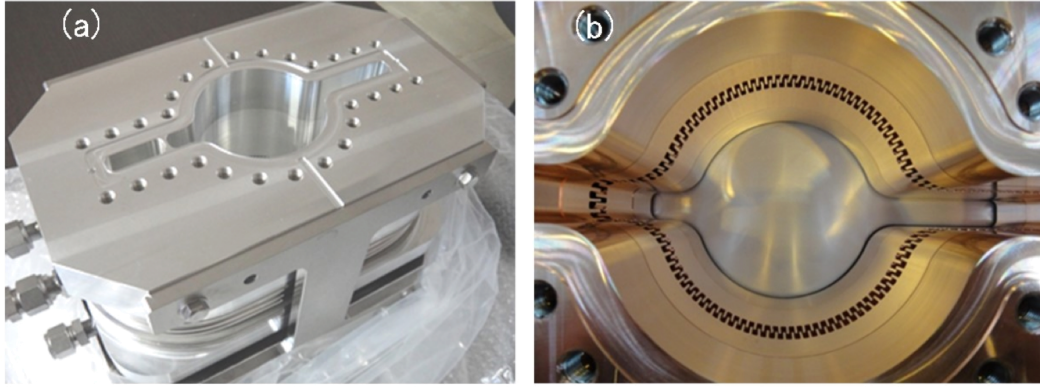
(a) Whole view and (b) inside view of a bellows chambers with a comb-type RF shield adapted to a beam pipe with antechambers.
